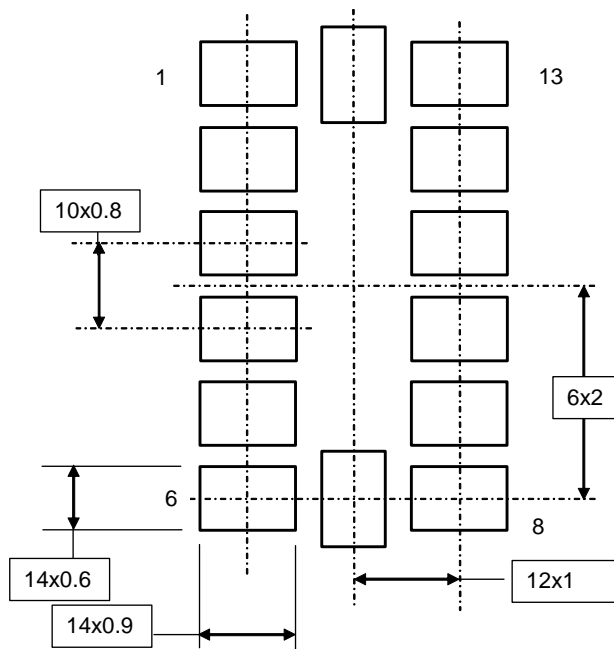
Recommended PCB Land Pattern for the 5 x 3 mm LGA Package
